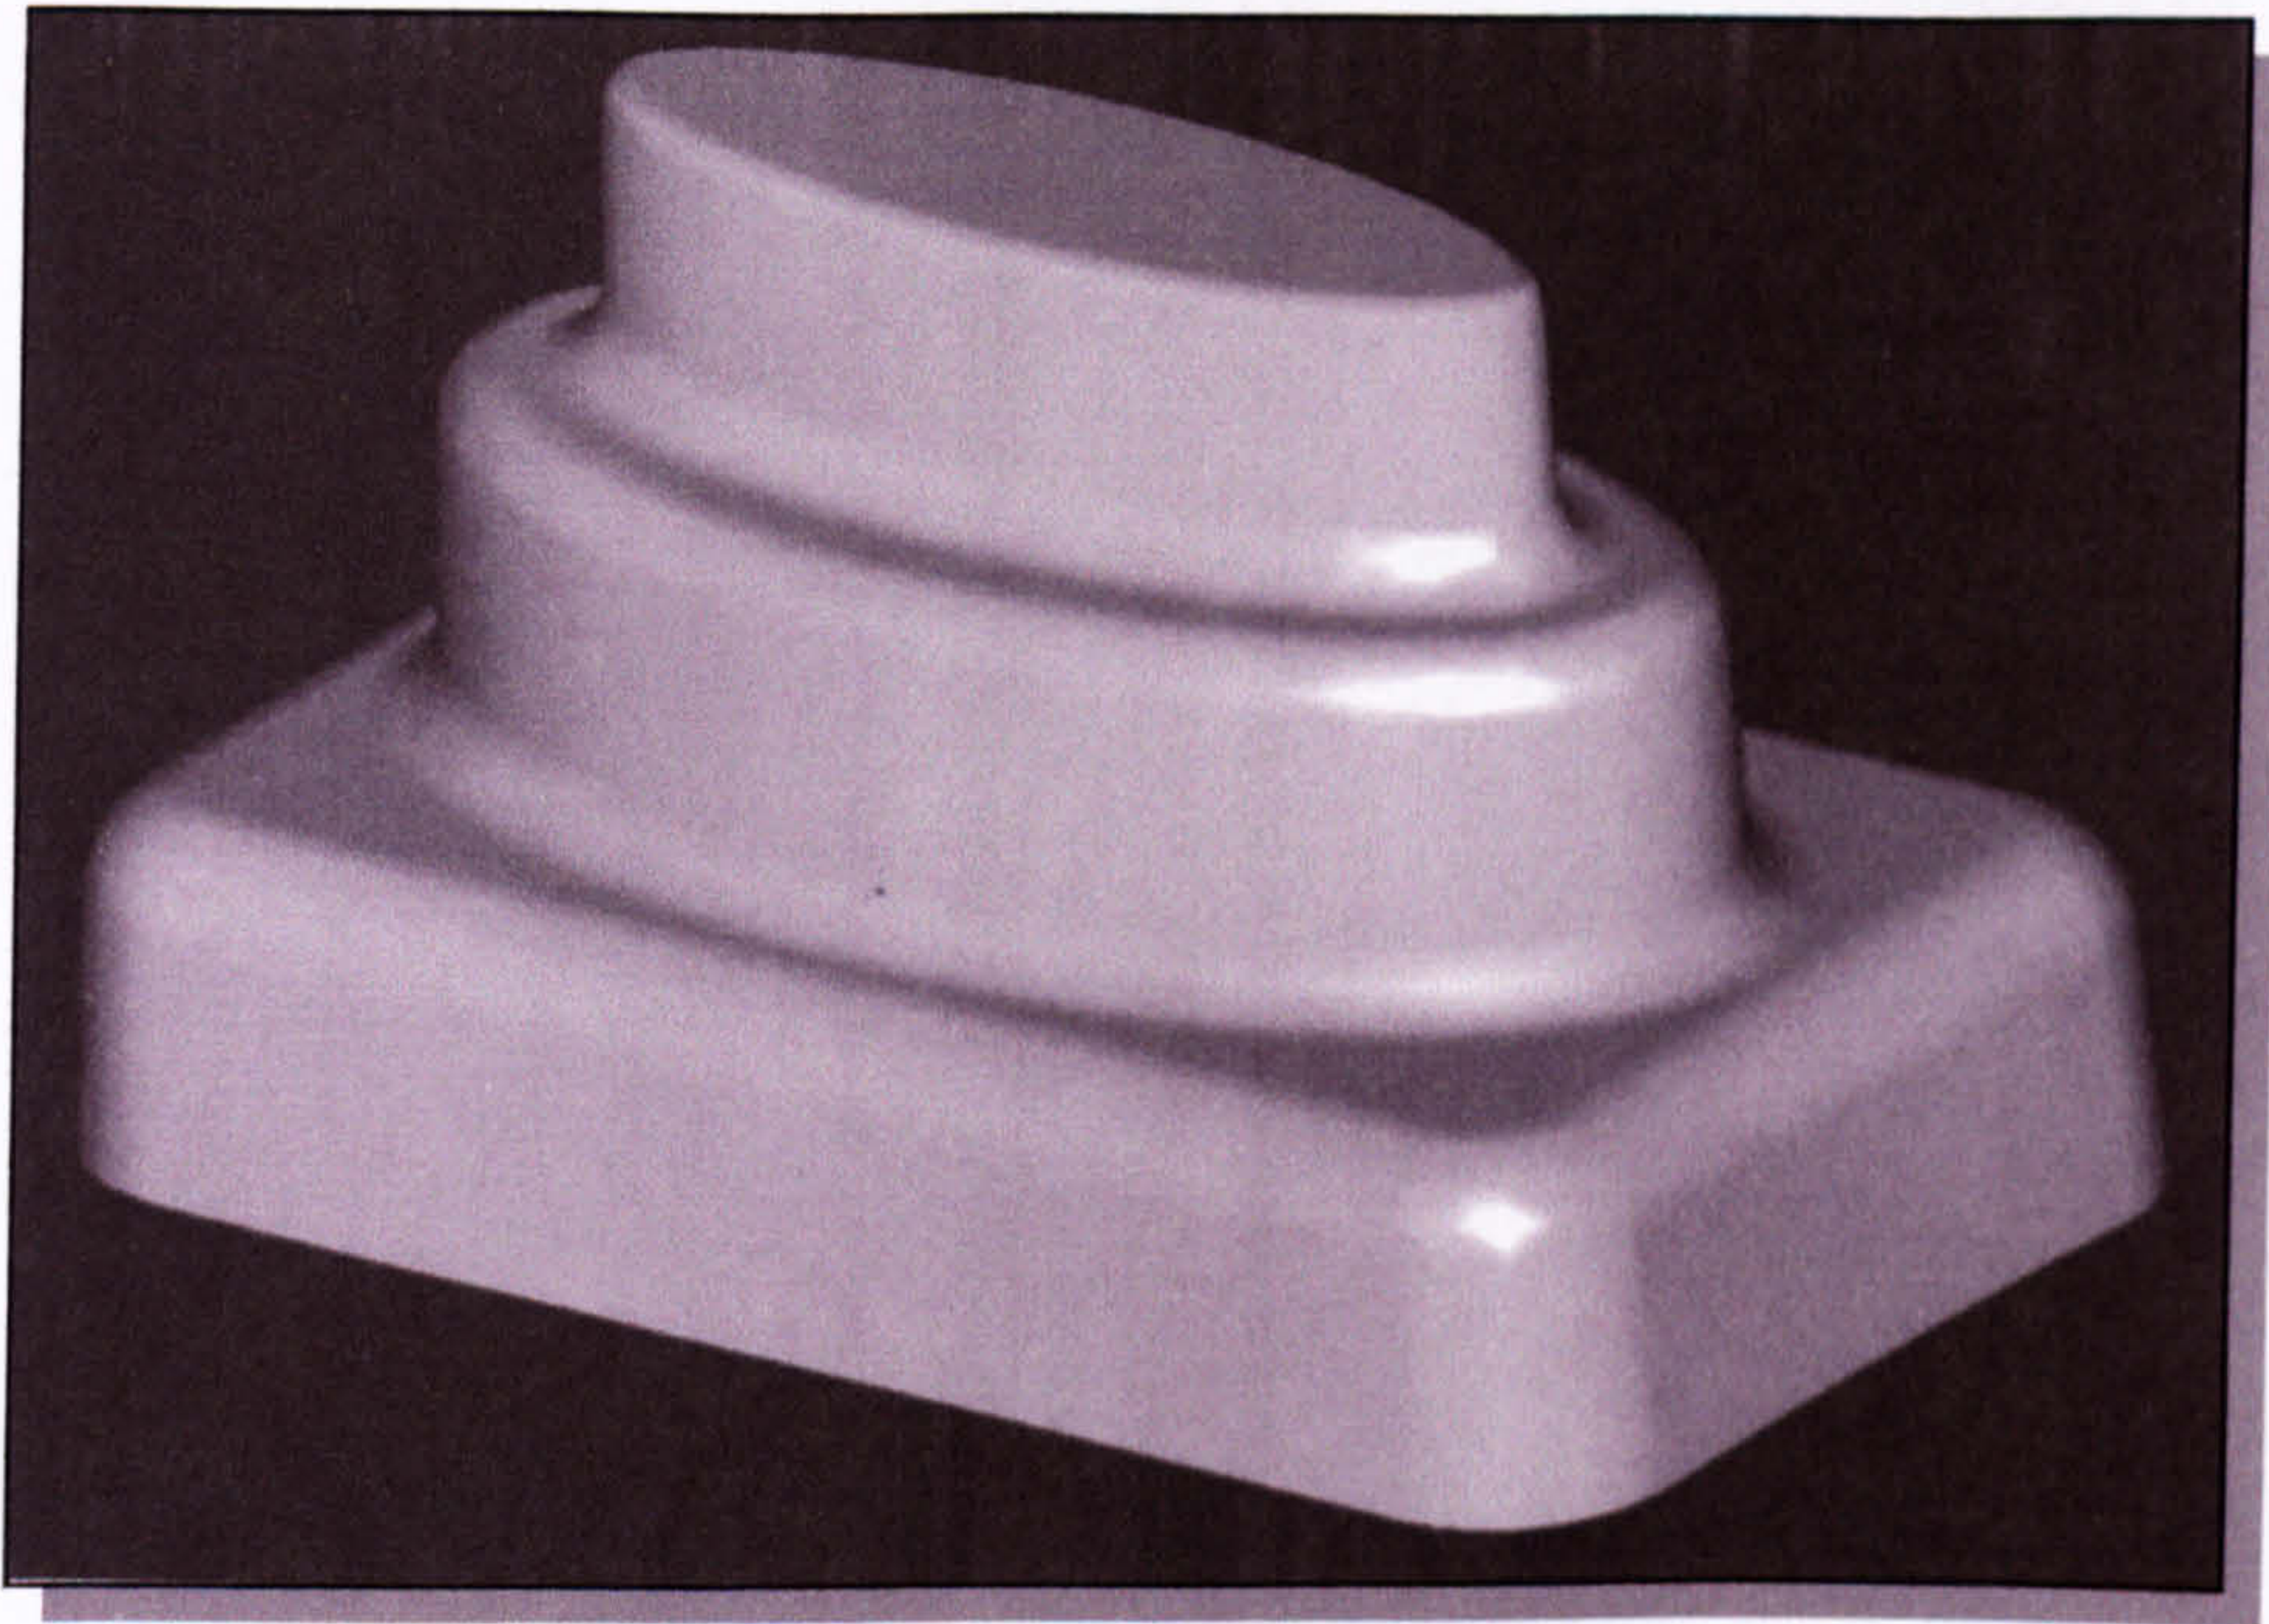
The initial CAD 'test' shape used as the basis for the Injection tool.
